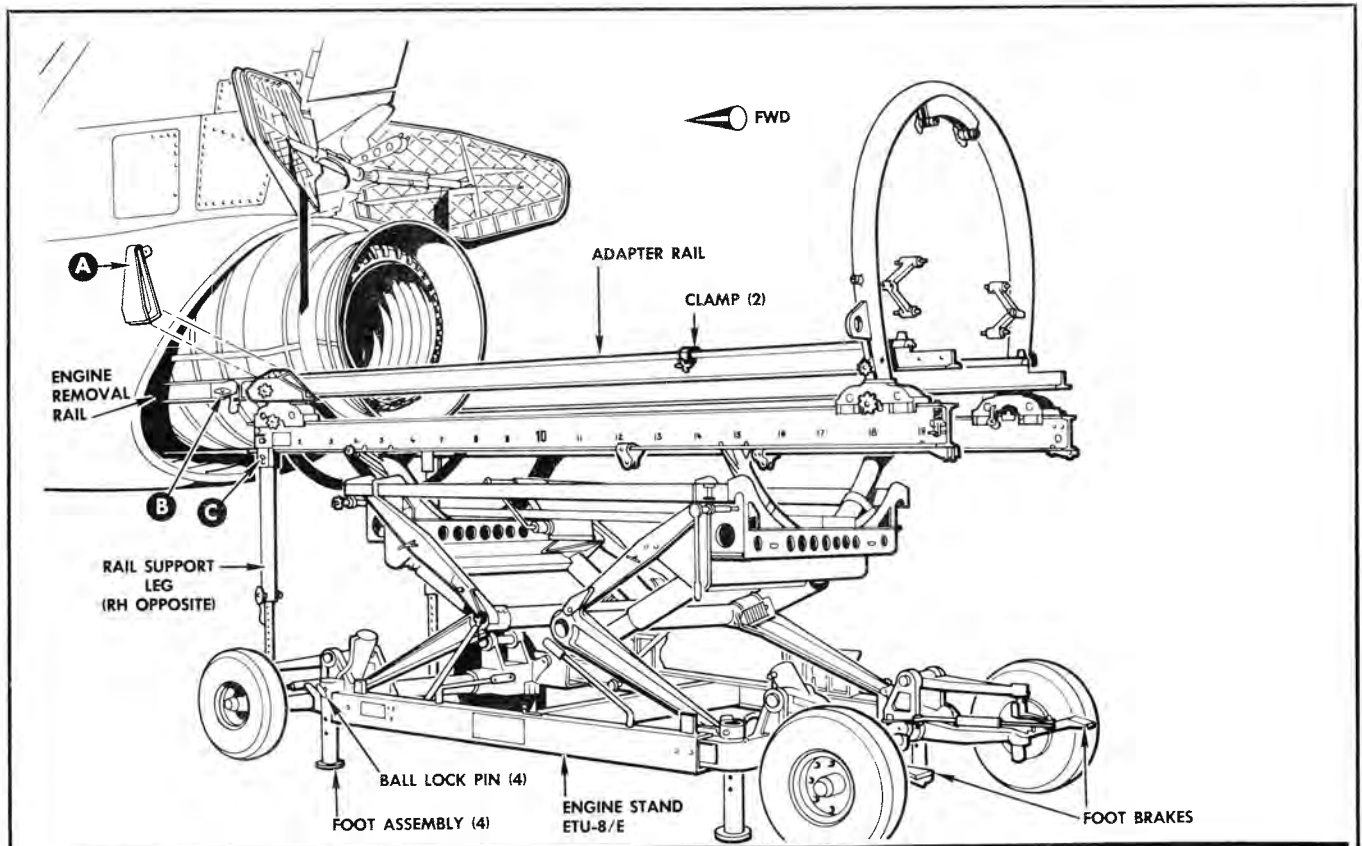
Engine Stand Preparation, Type USAF ETU-8/E Using Adapter Kit 8-96165 (Sheet 2 of 3)
